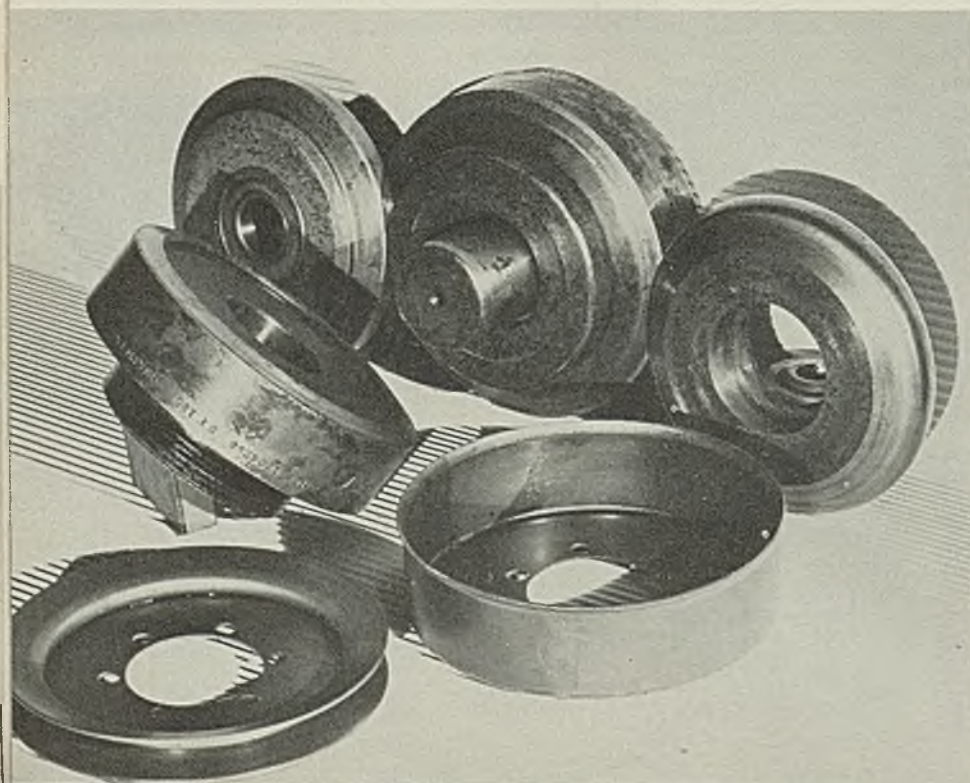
Shown here are forming machine rolls which are used for shaping strip steel products, also a typical die for spinning fan pulleys
